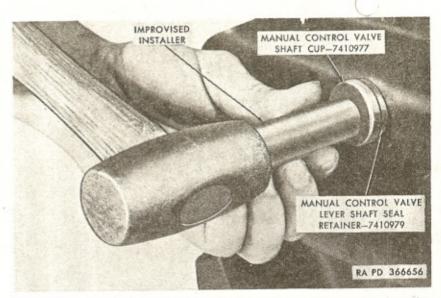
Installing manual control valve shaft seal retainer snap ring with improvised installer.
